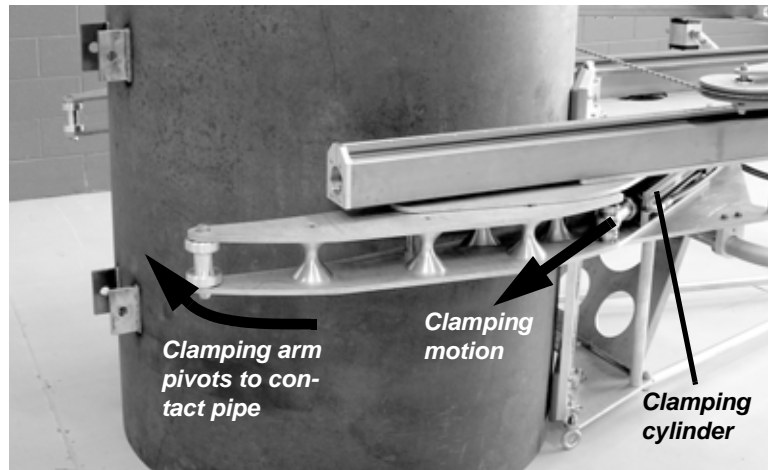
The photo shows the wire saw in position for clamping on a test workpiece. When the hydraulic cylinder is extended, the clamp arm pivots and closes on the pipe. Both clamping arms operate together.
